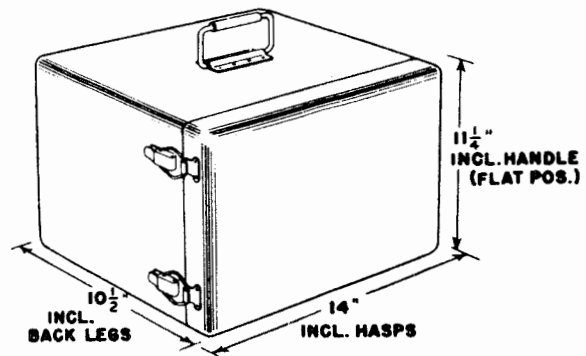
RF Signal Generator Set AN/URM-25D Outline Dimension Drawing
